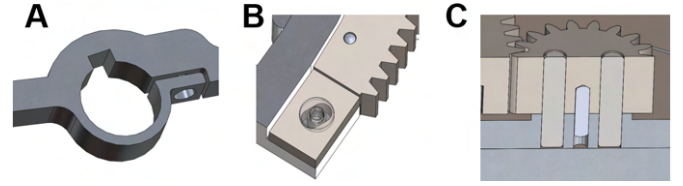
Key features of the ARES actuator. To ensure reduce the chance of play due to machining imprecision, a clamp (A) was designed into the partial spur gear and (B) spur steel gearing was on a slotted mechanism before pinning in place to enable effective teeth meshing. The input pinion gear was permanently fixed to a piece of 7075 aluminum (C) with two pins after a pilot pin was used to ensure the two parts were concentric.
